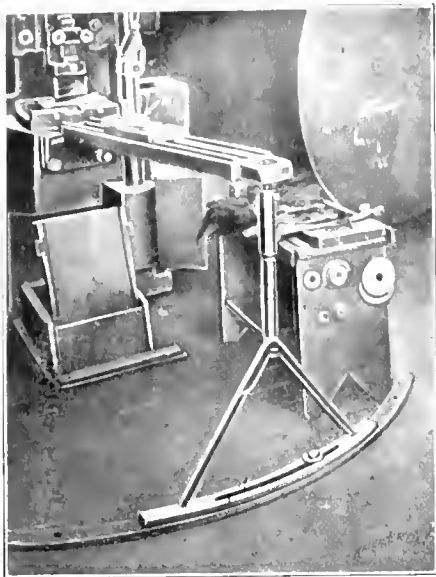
Indexing Jig used when Punching Circular Saw Teeth.
